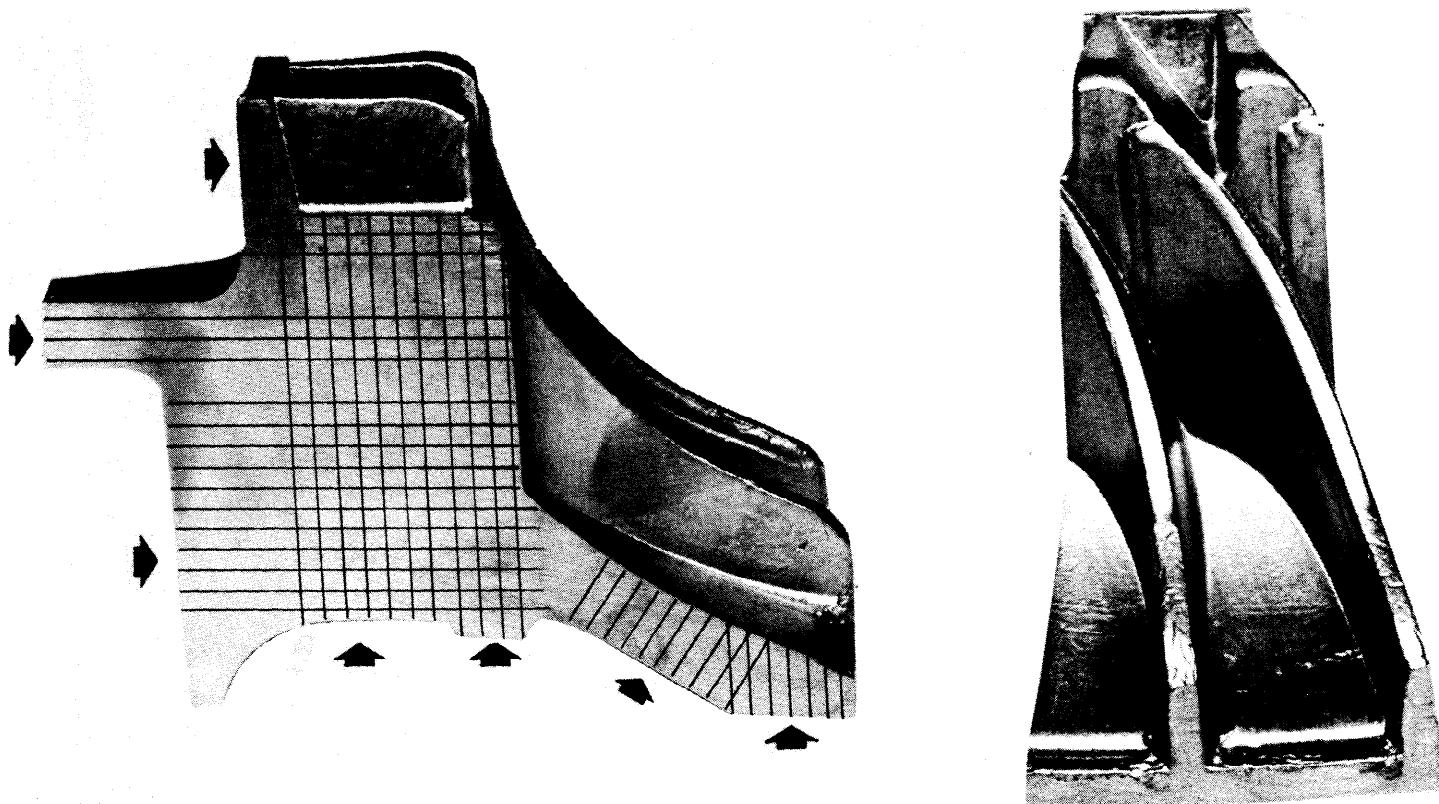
A Forging Section Showing Ultrasonic Inspection Direction and Coverage
